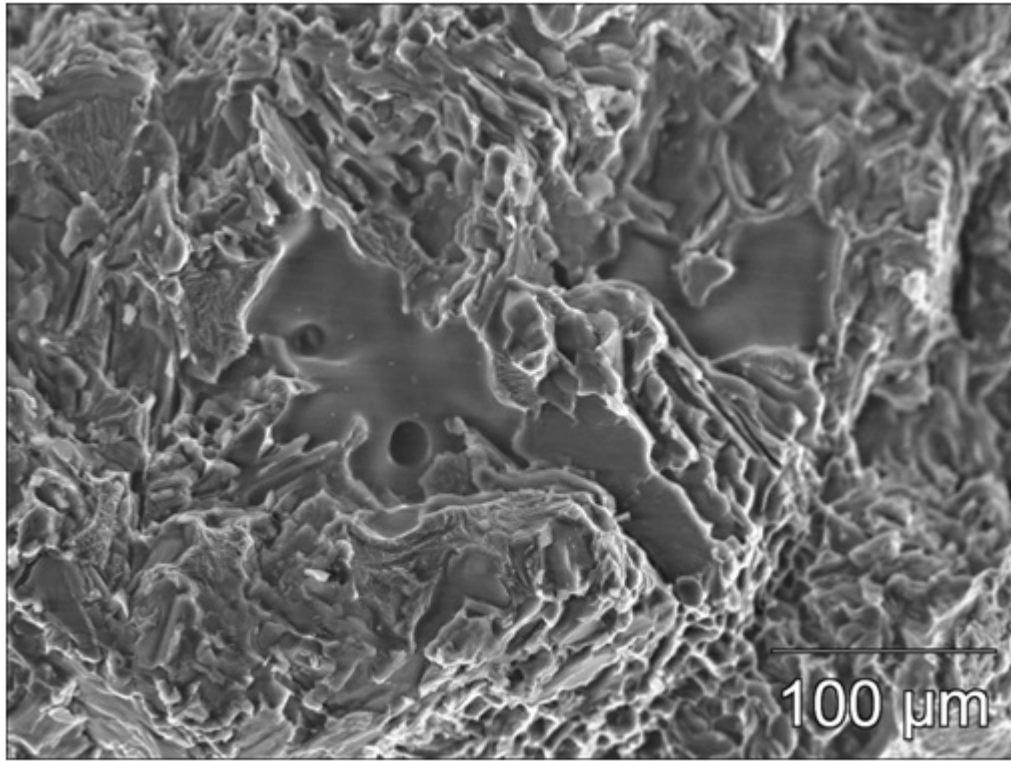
Close-up of fold defect from fracture surface of as-cast 356-T6 tensile specimen.
